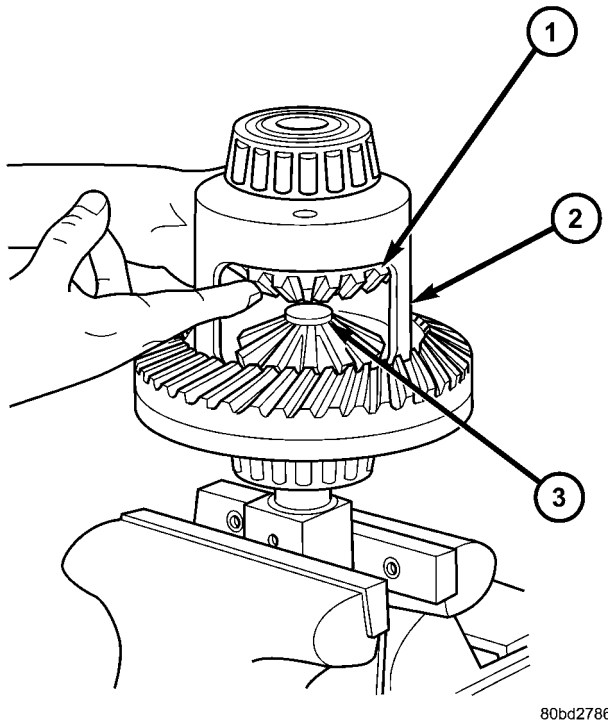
CLUTCH PACK AND LOWER SIDE GEAR
